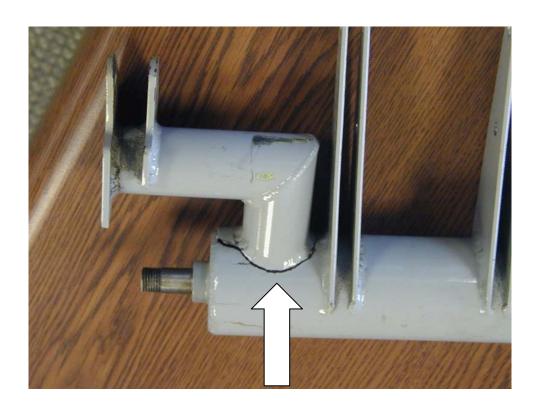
95661-3 torque shaft crack at linkage arm
